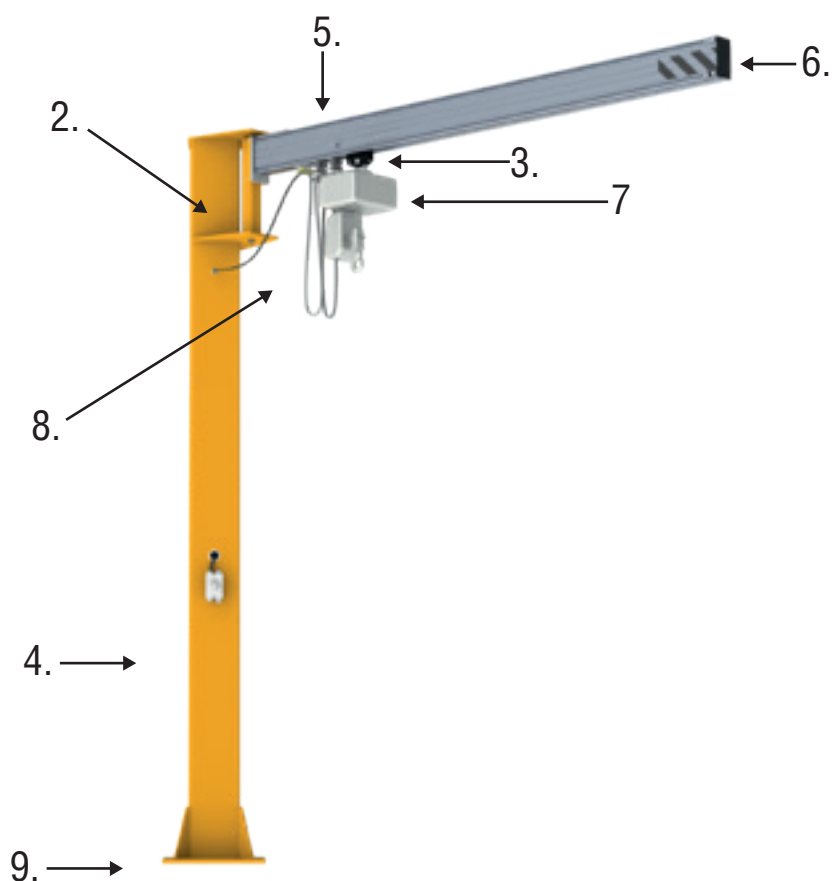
Column-mounted jib crane for low headroom applications, aluminium
